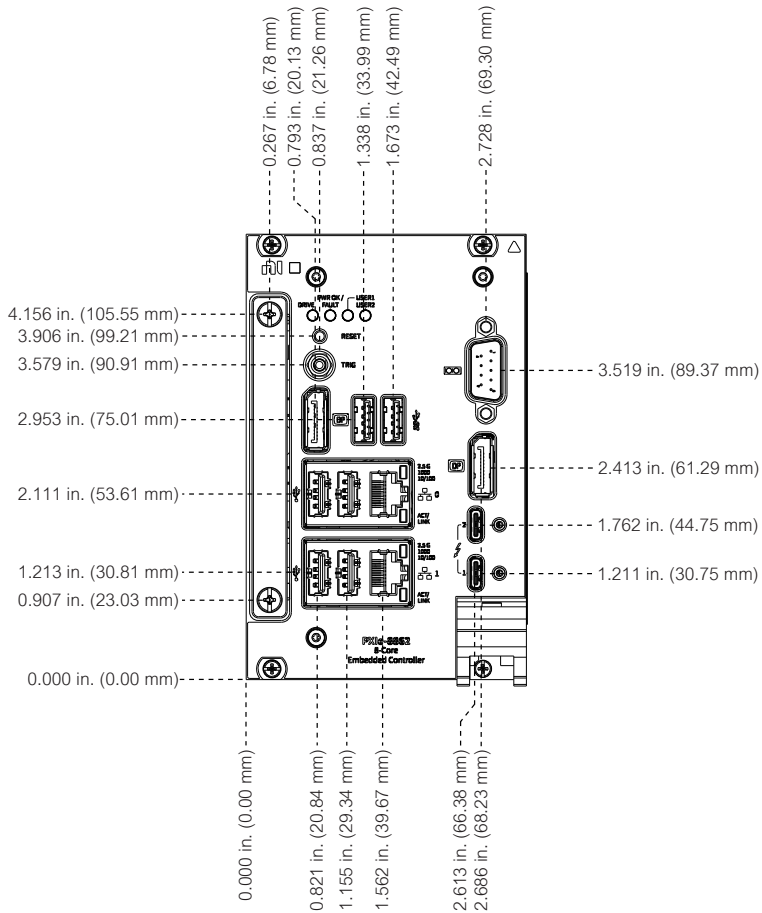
PXle-8862 with Removable Hard Drive and Without GPIB Front Panel Layout and
